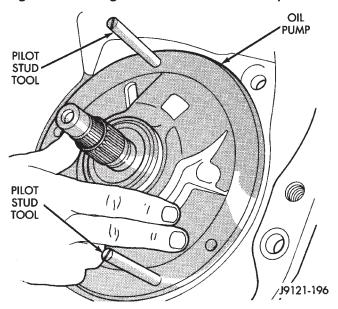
Installing Oil Pump And Reaction Shaft Support
